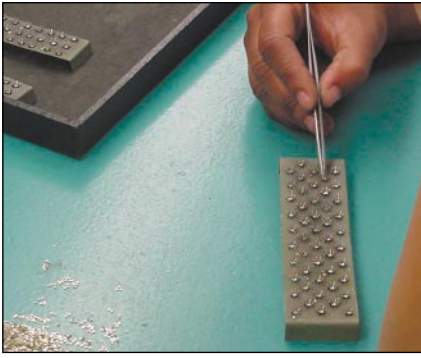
Racked settings having chip solder being dropped into them prior to heating
